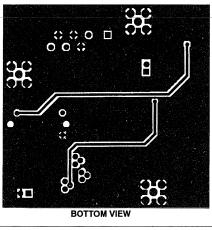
SA8025ADK Demoboard Layout (NOT ACTUAL SIZE)
